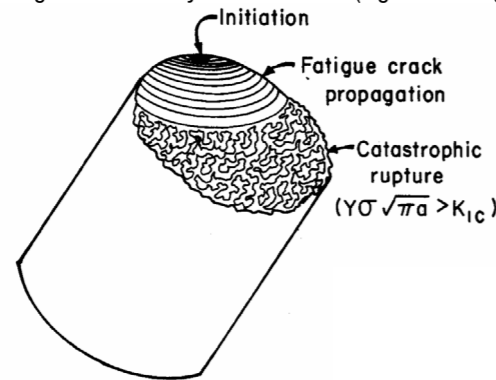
Schematic drawing of the fatigue fracture surface of a circular shaft.
